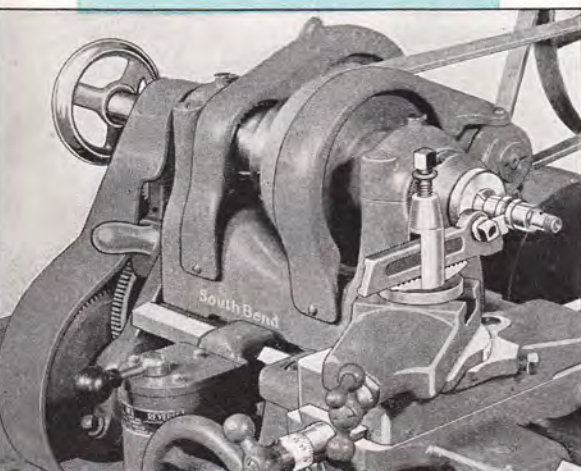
Machining Small Part Held in Hand Wheel Collet Chuck Attachment.
